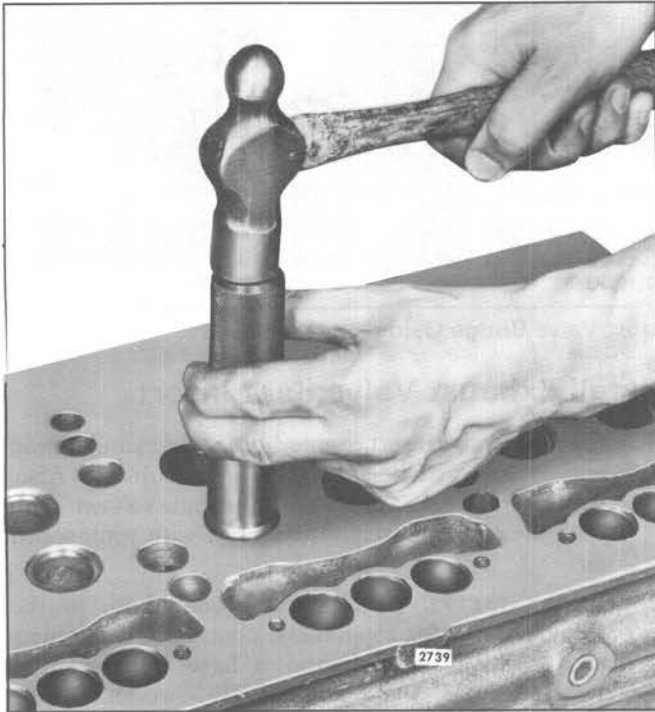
Installing Valve Seat Insert with Tool J 24357
